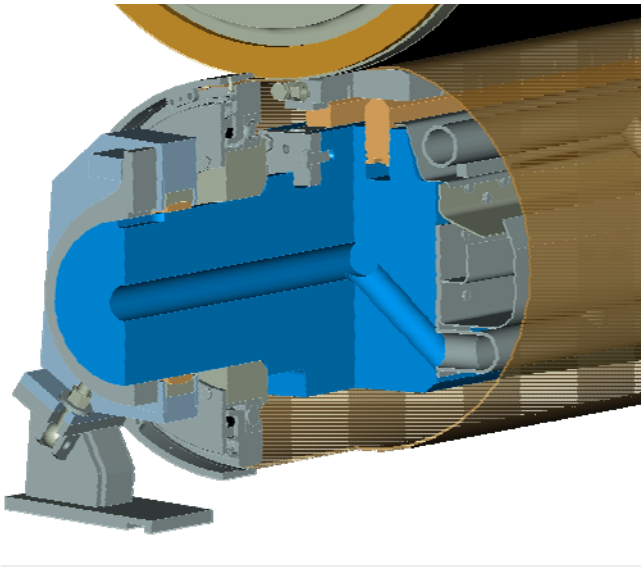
SMARNIP® Mini Shoe Press module cross-section
